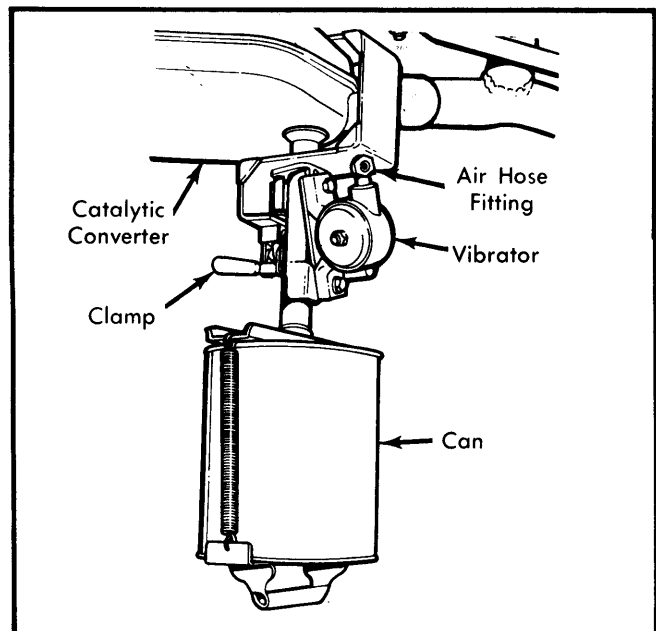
Placement of Vibrator & Catalyst Container American Motors and General Motors Vehicles Only
